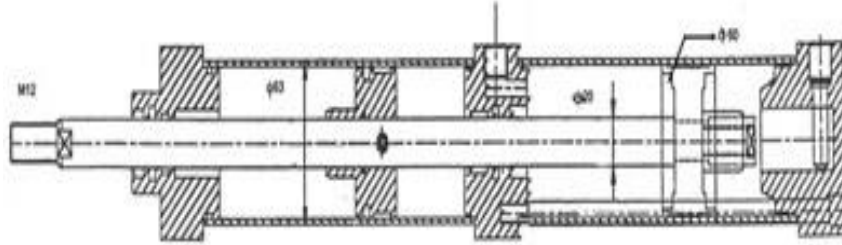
Cross sectional view of Pneumatic Cylinder
